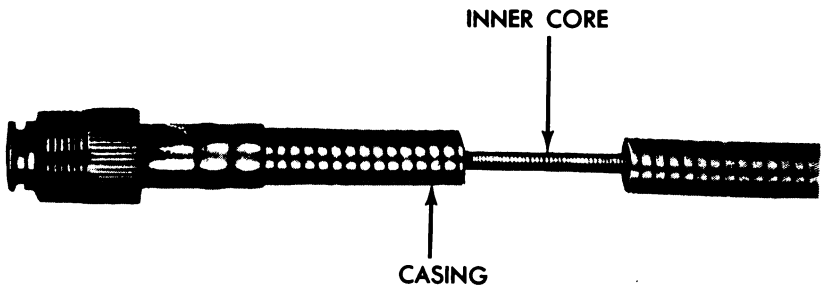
Speedometer and Tachometer Flexible Drive Shaft.
